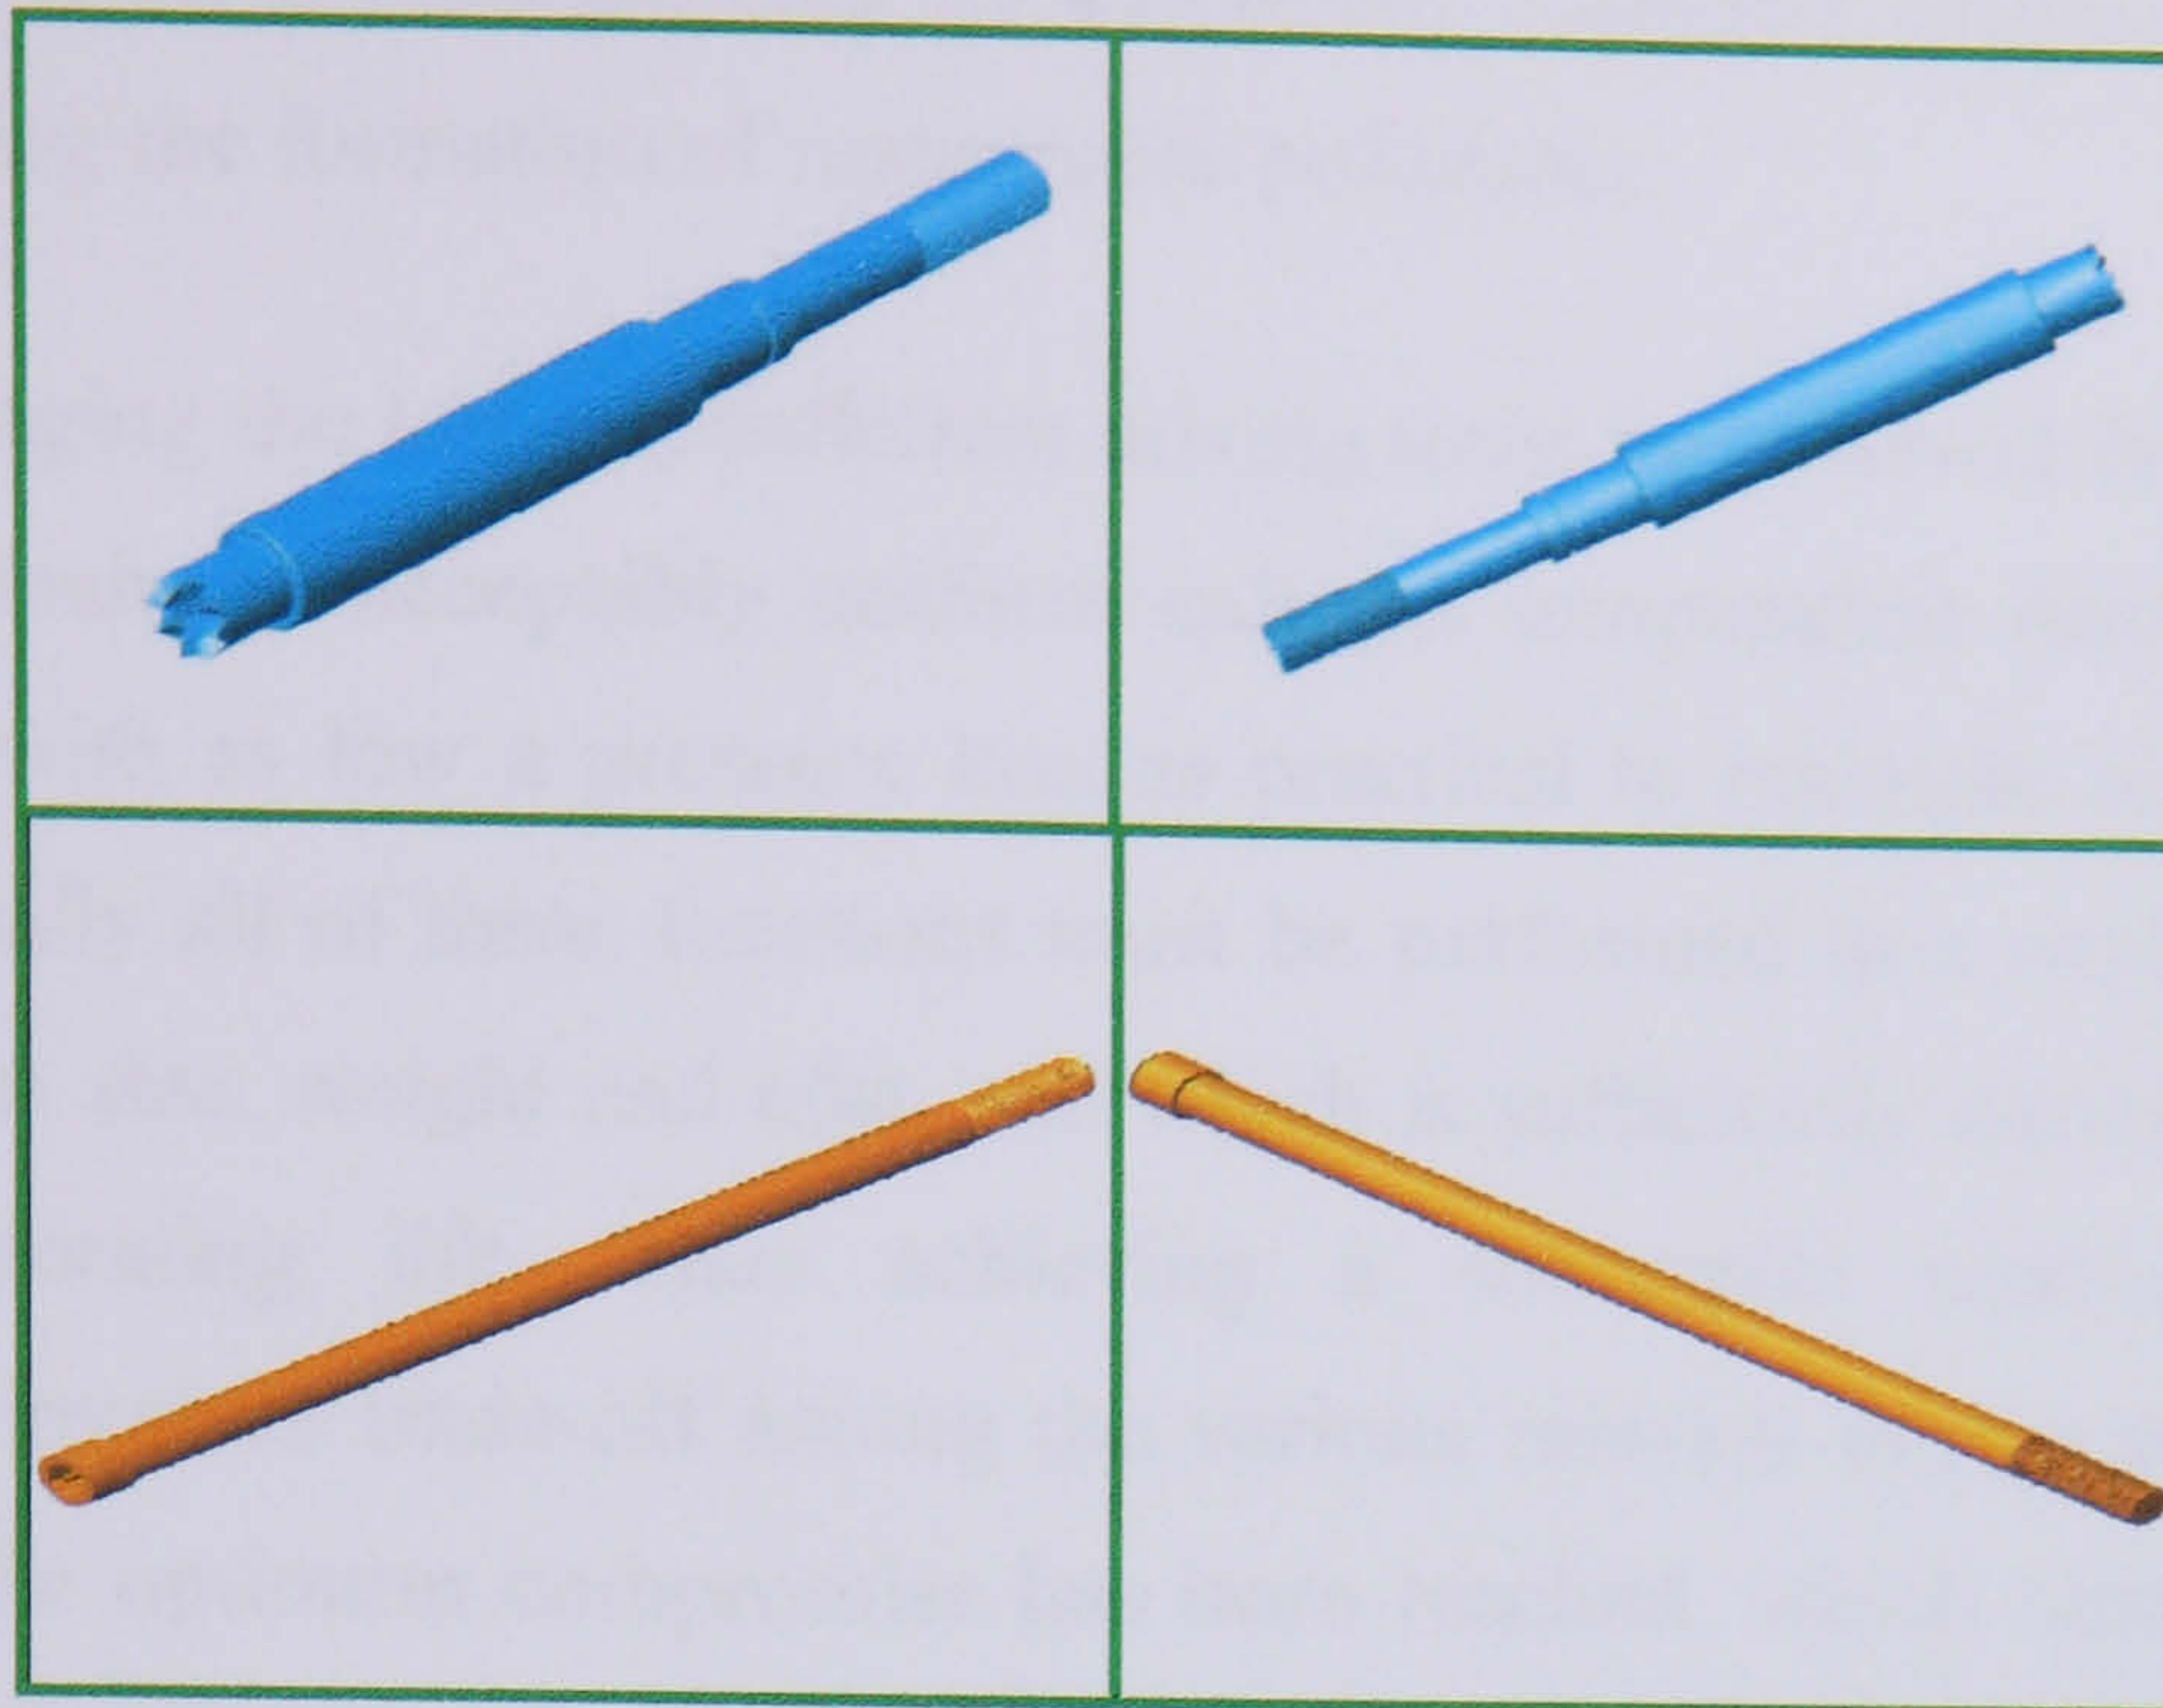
THREE DIMENSIONAL SOLID MODEL OF THE HOLLOW SHAFT AND THE MAIN BOLT
